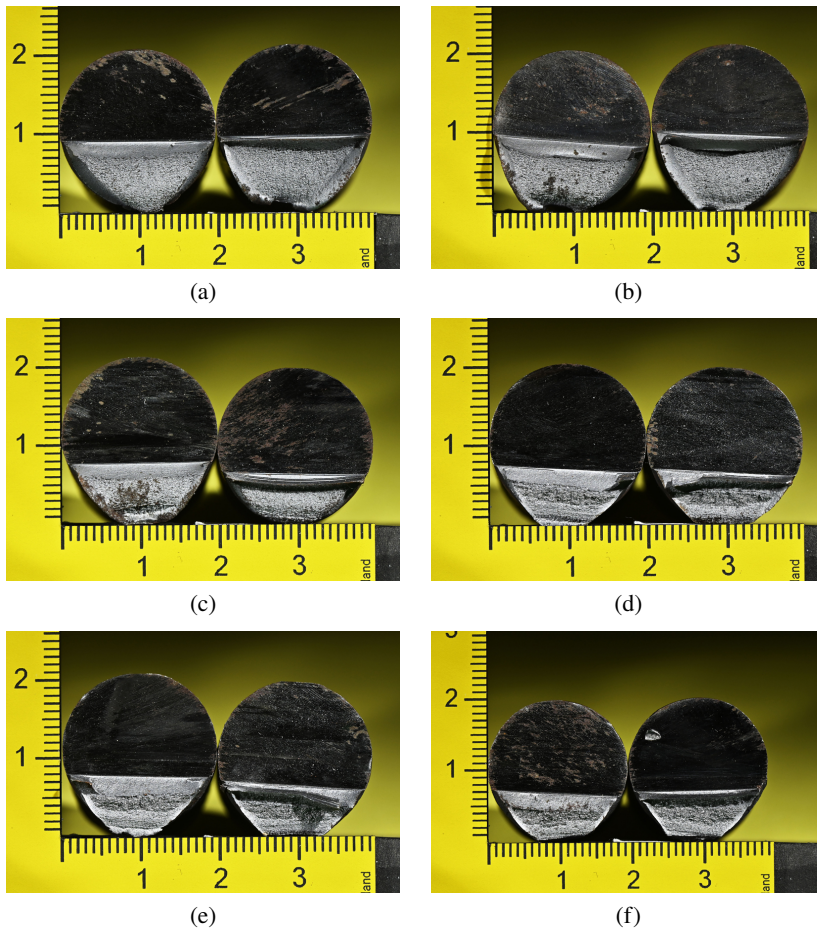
Sample fractures of AC specimens (cooled in air), after impact testing:
